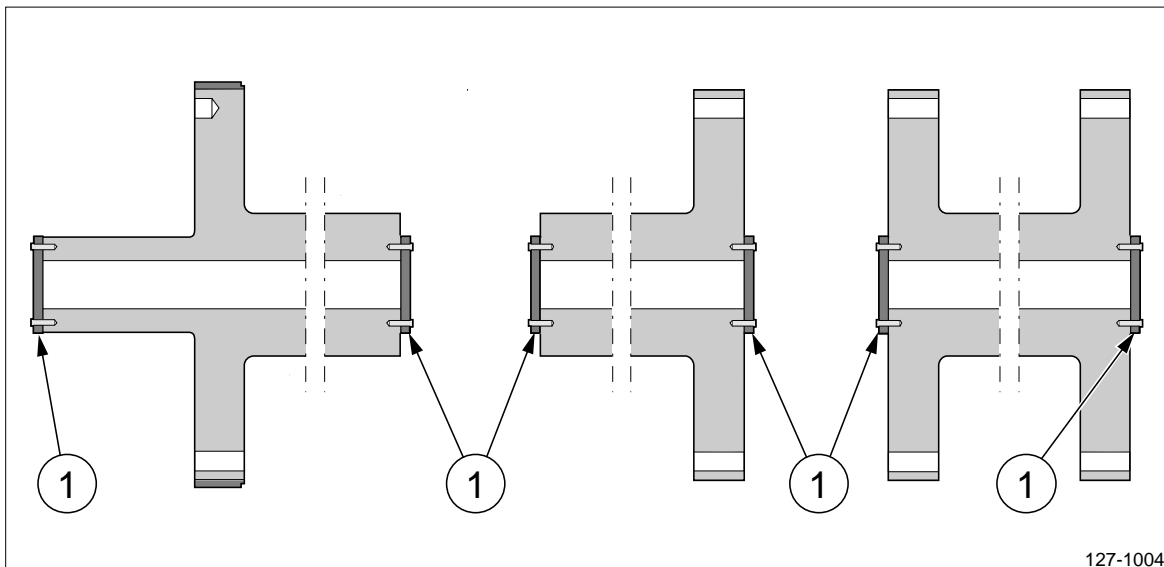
Examples of blanking flanges for propeller shafts and intermediate shafts.
